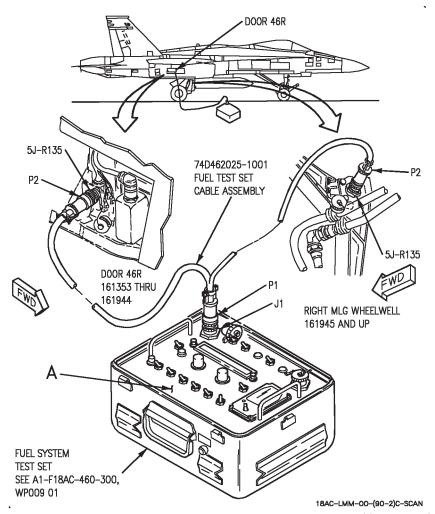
External Fuel Tanks Transfer Test (Sheet 2)
